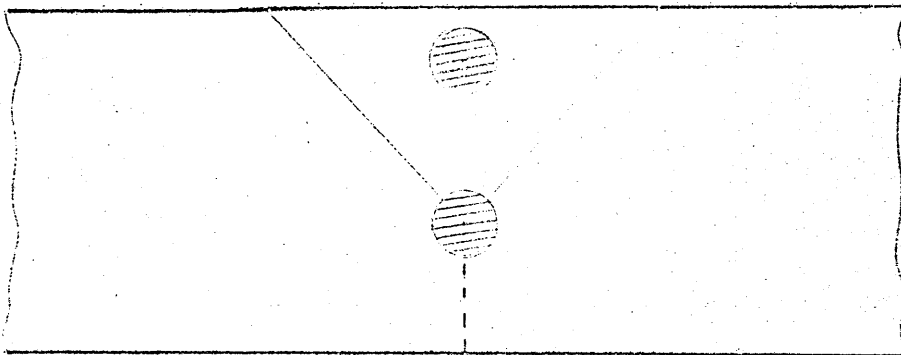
Location of the longitudinal tensile specimens sub-surface and root.
